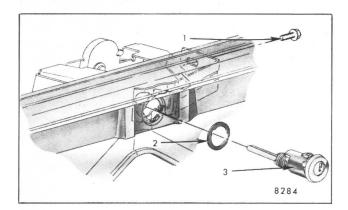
Side Loading Lock Cylinder Retainer - Pontiac "F" Styles
